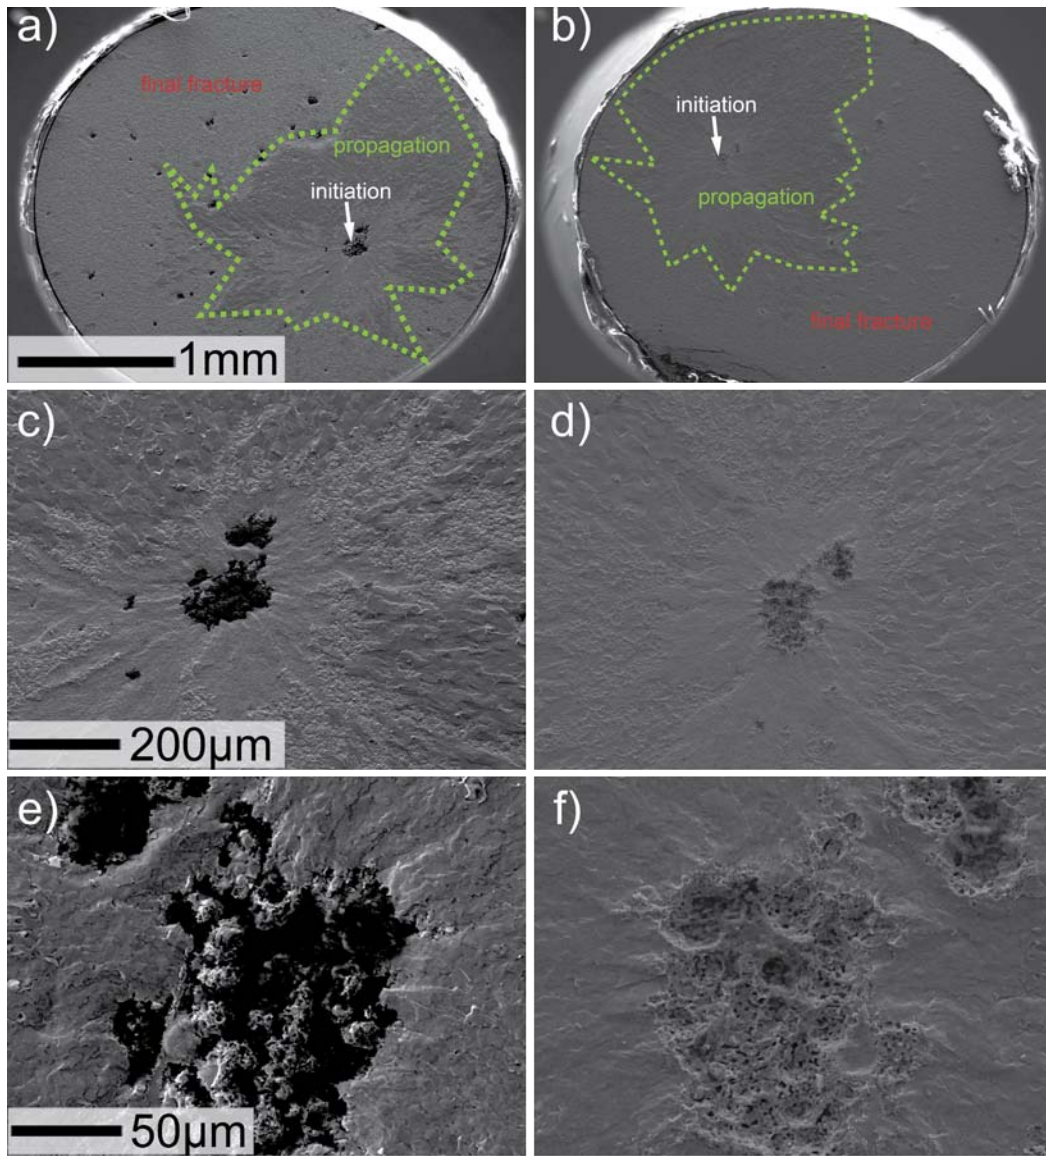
Typical fatigue fractographs of mode I fatigue specimen (0°): (a & b) give an overview indicating the fatigue initiation in the center of the bond in aluminum, followed by a radially outwards crack propagation in Al_2Cu . Final fracture occurred in the bond periphery in the most brittle intermetallic, AlCu , denoted by an intergranular fracture type. (c & d): close-up of crack deflection. (e & f): high-light of dimples in Al.
